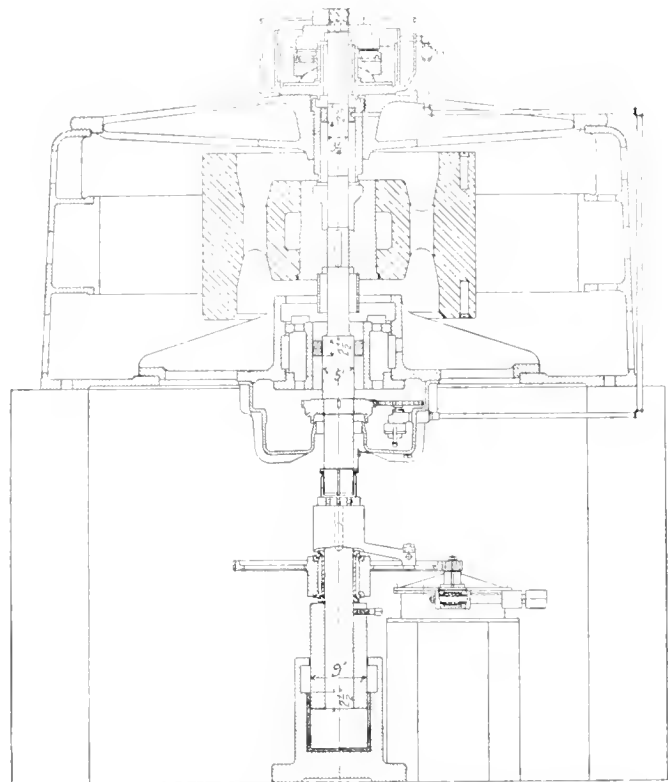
VERTICAL SECTION OF THRUST-BEARING TESTING MACHINE SHOWN IN FIG. 1
